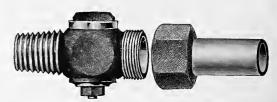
STRAIGHT COUPLING, COARSE THREAD ON LONG END, FOR WOOD PIPE.
